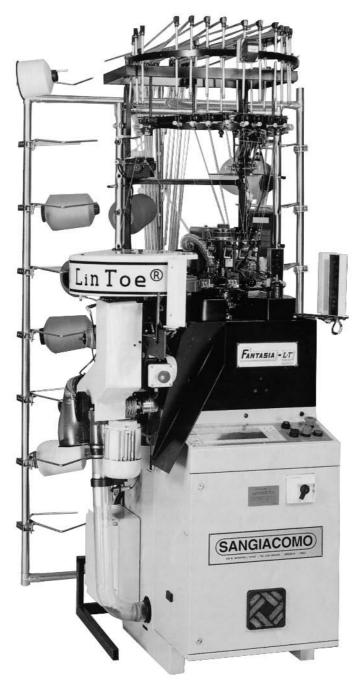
Lin Toe toe-closing on the machine [Sangiacomo].
